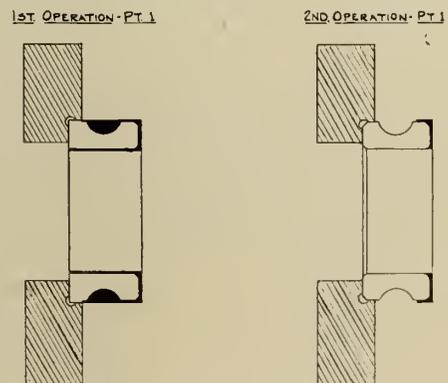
Turret Lathe First and Second Operations for Outer Ring Machining.
